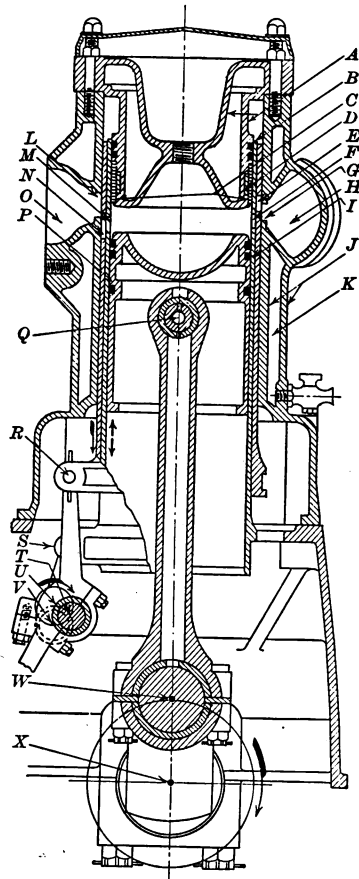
SECTION OF THE LYONS-KNIGHT SLEEVE-VALVE ENGINE
